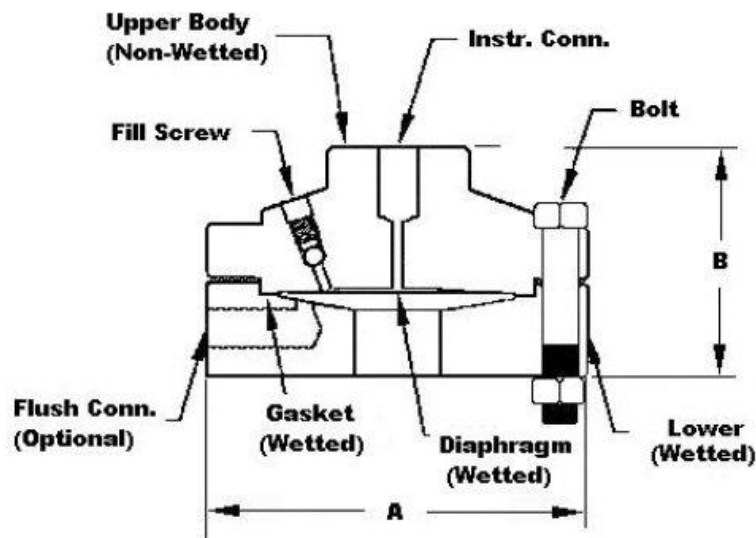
Seal Dimensions (Threaded Process Connection Seals)
